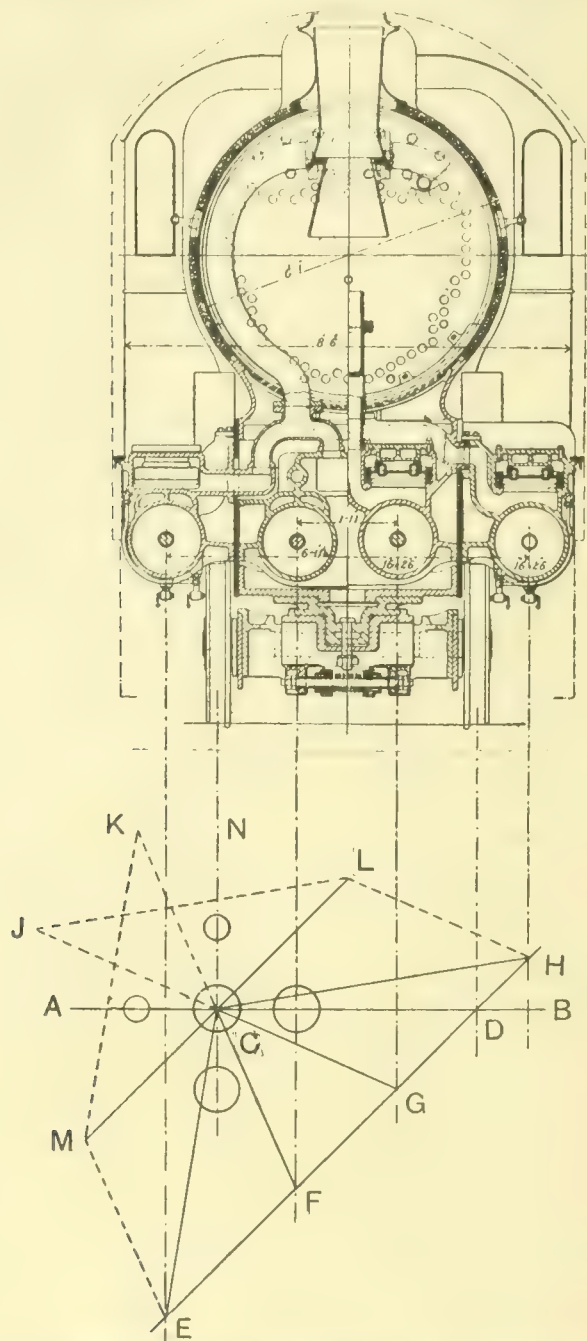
BALANCING DIAGRAM. 4-CYLINDER L. & Y. LOCOMOTIVE. RECIPROCATING PARTS ONLY.
